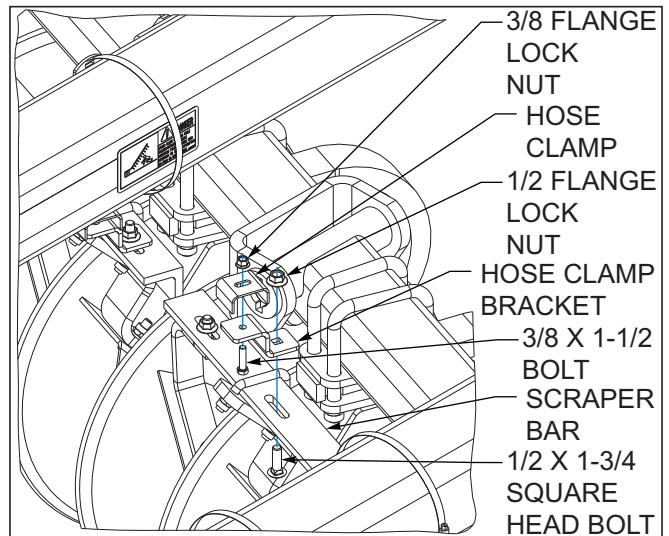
8 Port Manifold Installation 21'-26', 30'
